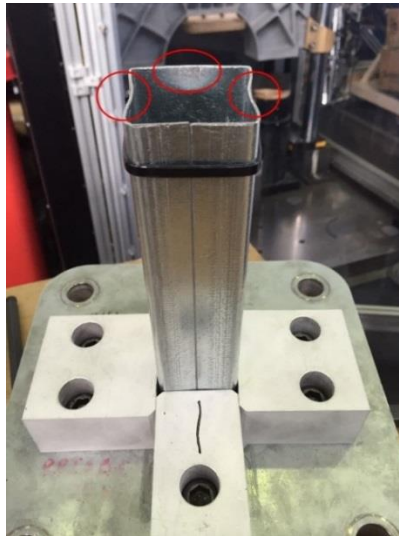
Fixture of samples in the dynamic crushing tests
